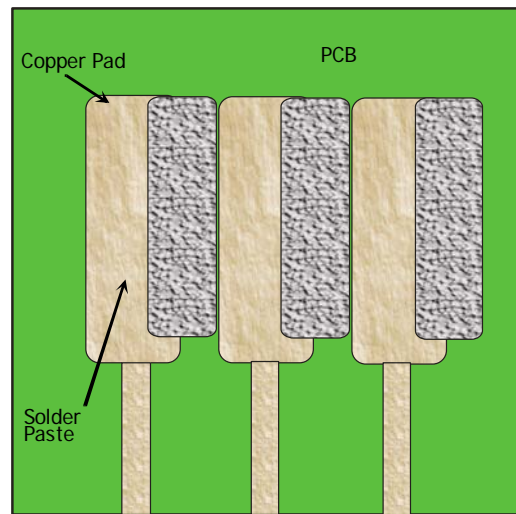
Clearly mis-aligned solder paste that would most likely cause assembly errors.
